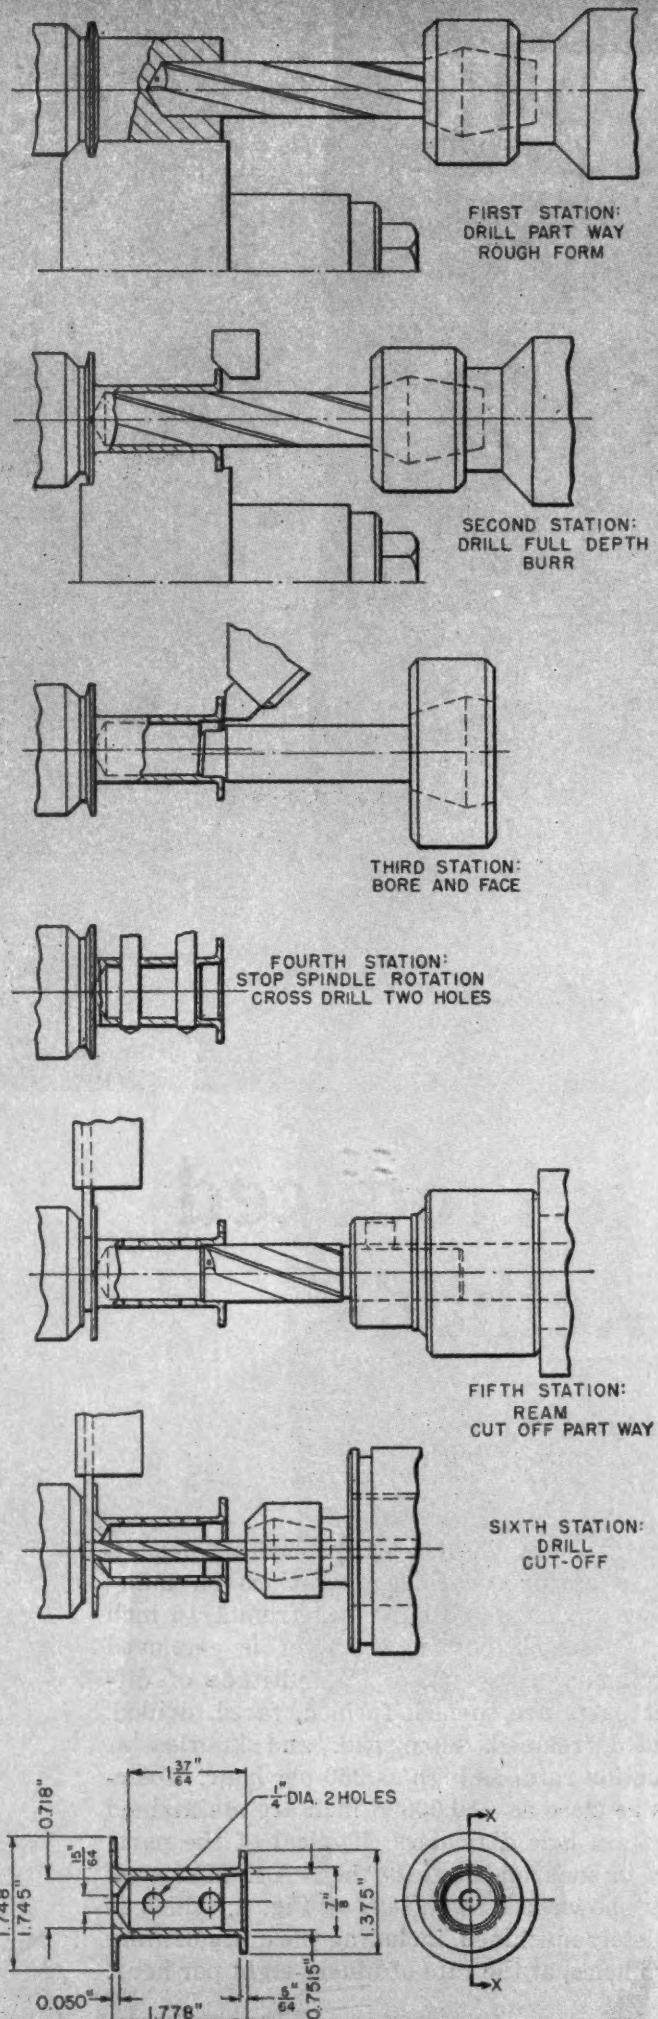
Successive operations performed on a six-spindle automatic in producing steel pulleys (shown at the bottom) at the rate of 98 per hour
